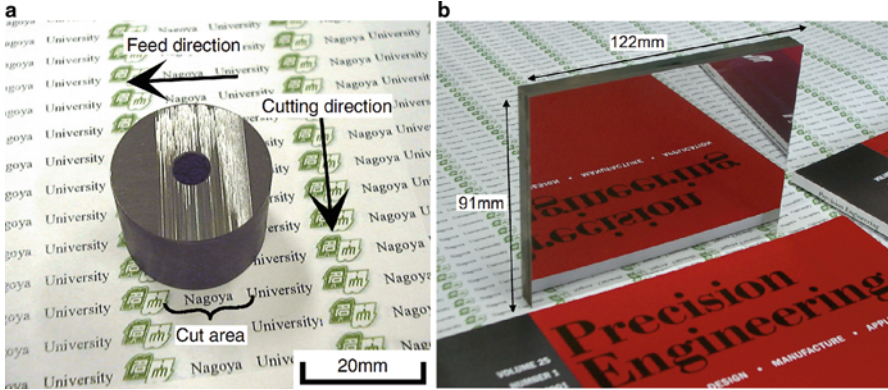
Photographs of surface finished by (a) ordinary cutting and (b) mirror surface finished by elliptical vibration cutting. (Conditions (a)) workpiece: hardened die steel (JIS – SUS420J2, HRC42), cutting speed, 1.0 m/min; depth of cut, 3.5 μm (set value); pick feed, 5 μm ; diamond tool, R 1 mm; rake angle, 0 deg. (Conditions (b)) workpiece: hardened die steel (JIS – SUS420J2, HRC53), cutting speed, 0.7 m/min; depth of cut, 5 μm ; pick feed, 10 μm ; diamond tool, R 1 mm; rake angle, 0 deg.; vibration, circular; amplitude, 3 μm_{0-p} ; frequency, 19.6 kHz
